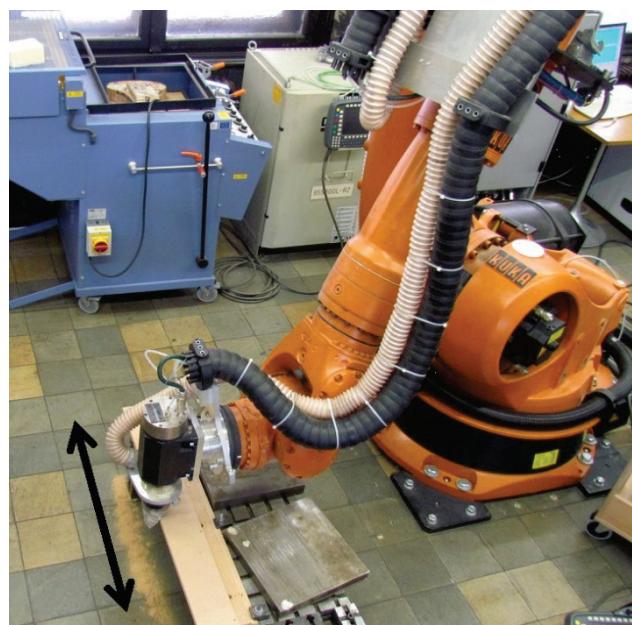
Up and down milling strategy used in tool wear tests (pose D)
